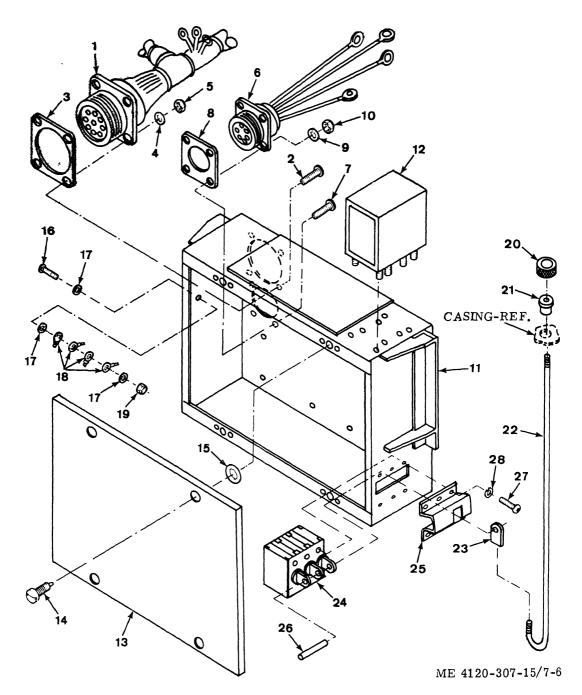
Junction box assembly, exploded view. (sheet 1 of 2).
